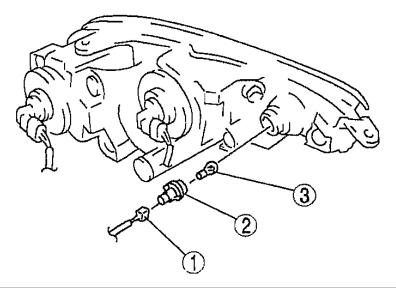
Removing Headlight Bulb Courtesy of MAZDA MOTORS CORP.
